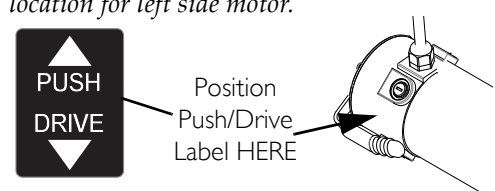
Installing the SSD Motor Push/Drive Label
